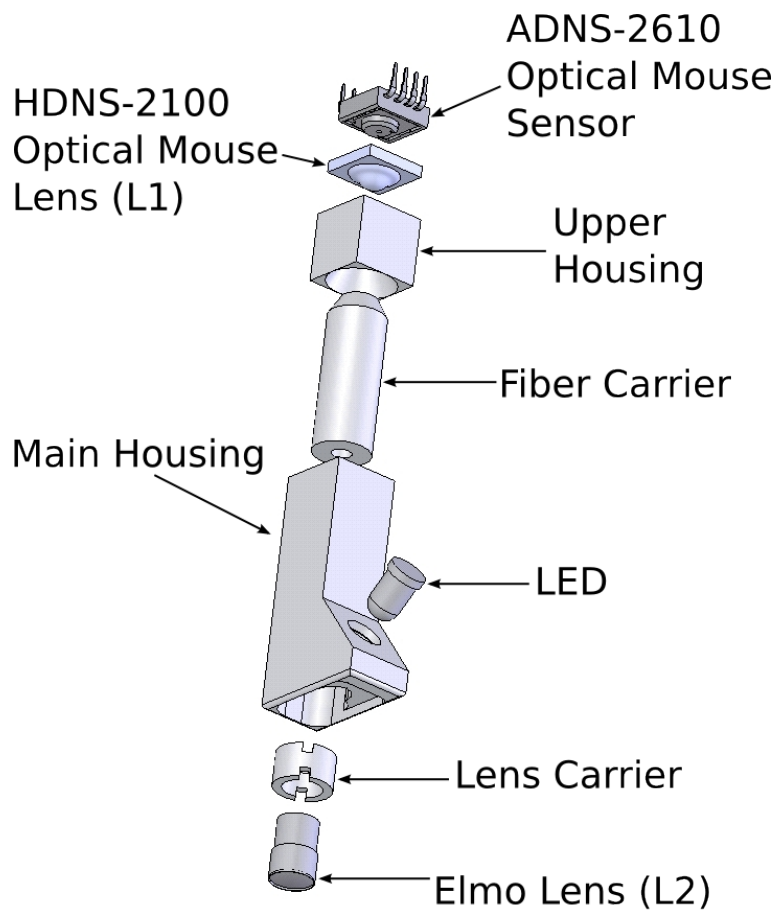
is an exploded view of the entire indirect imaging assembly. The main housing is very similar to that of the direct imaging assembly. It is machined in aluminum, the LED
